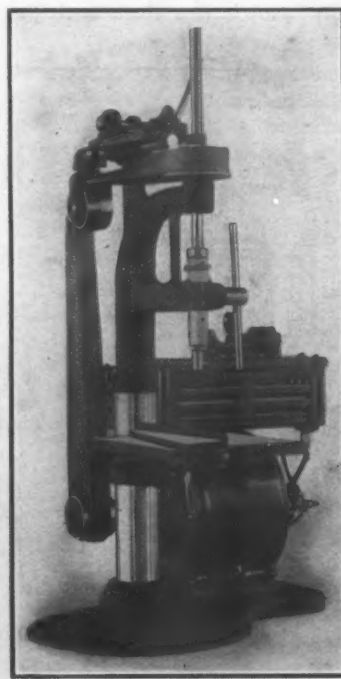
A 10-In. Motor Driven Sensitive Bench Drill.
